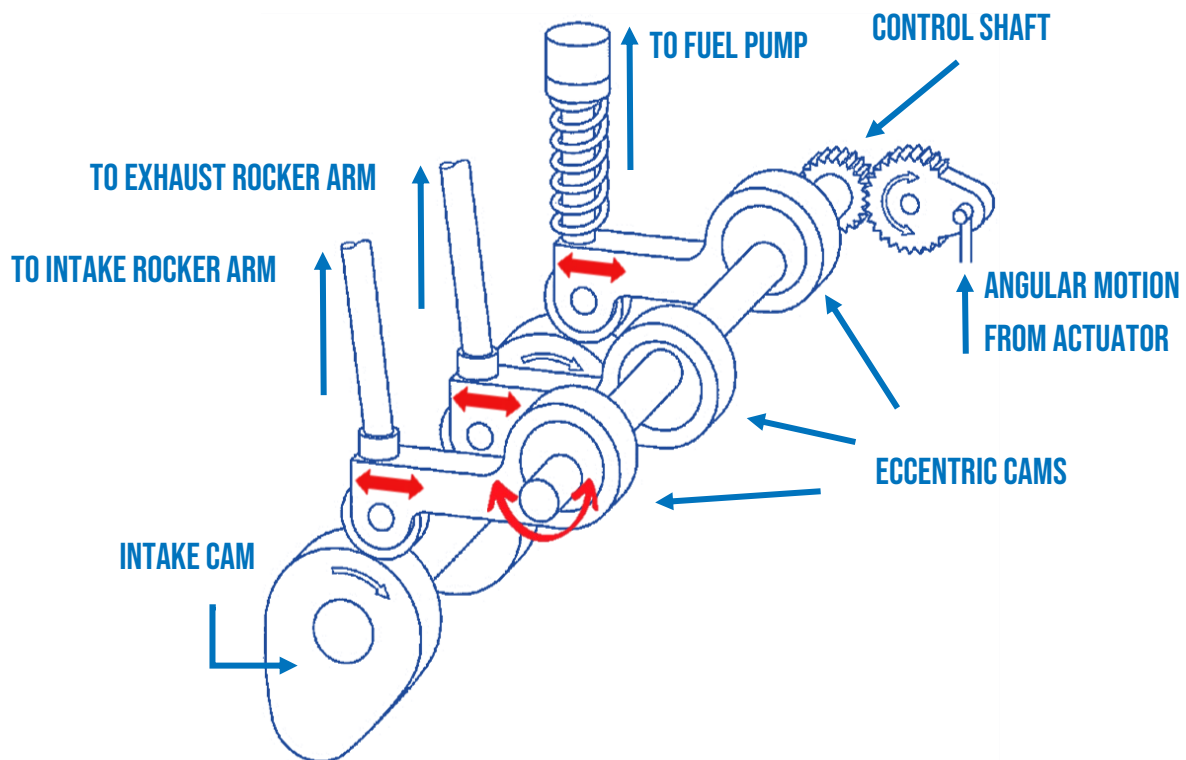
Schematic diagram for the valve drive in FCT mechanism. Adapted from [72].
